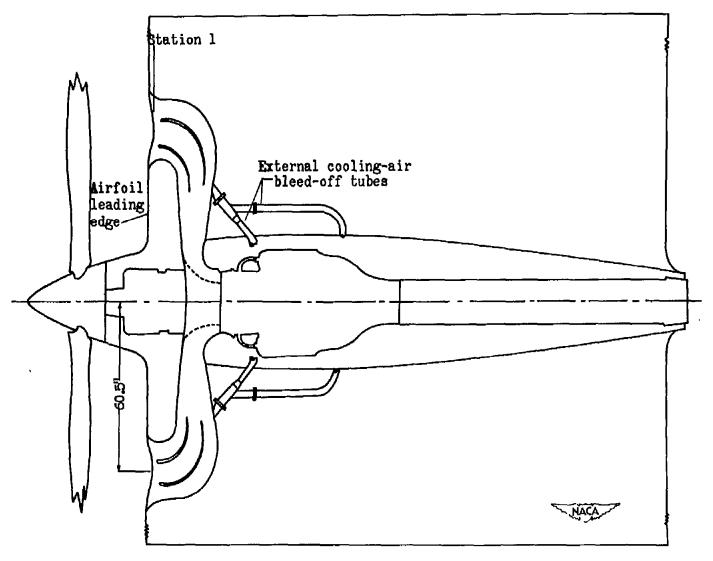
Sketch of TG-100A gas turbine-propeller engine Installation showing location of wing ducts and inlets.
